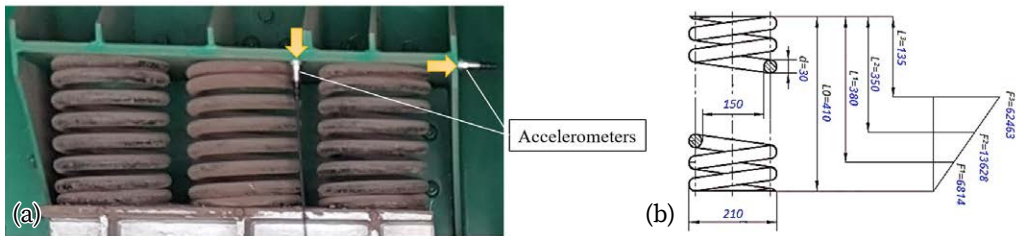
Supporting unit with springs: (a) vibration sensors placement; (b) geometry and deformation limits of a single helical spring
